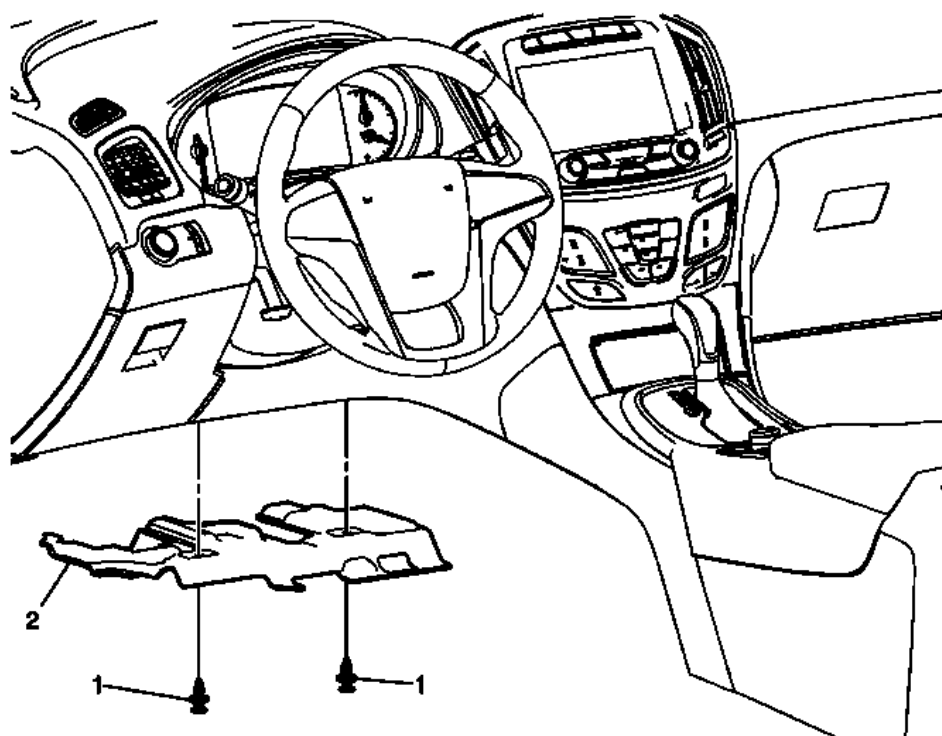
Instrument Panel Lower Trim Panel Insulator
